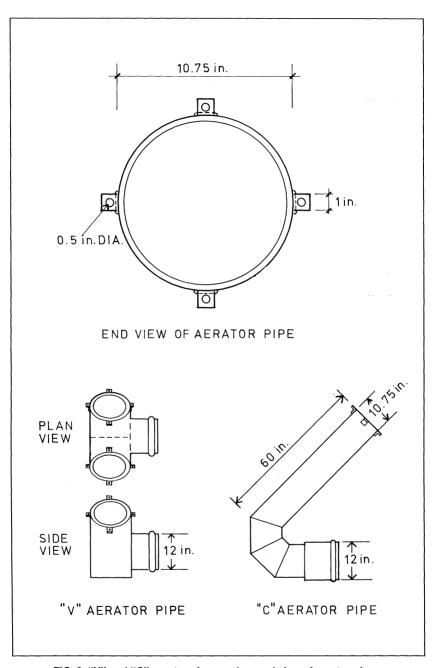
"V" and "C" aerator pipes and an end view of aerator pipes.
